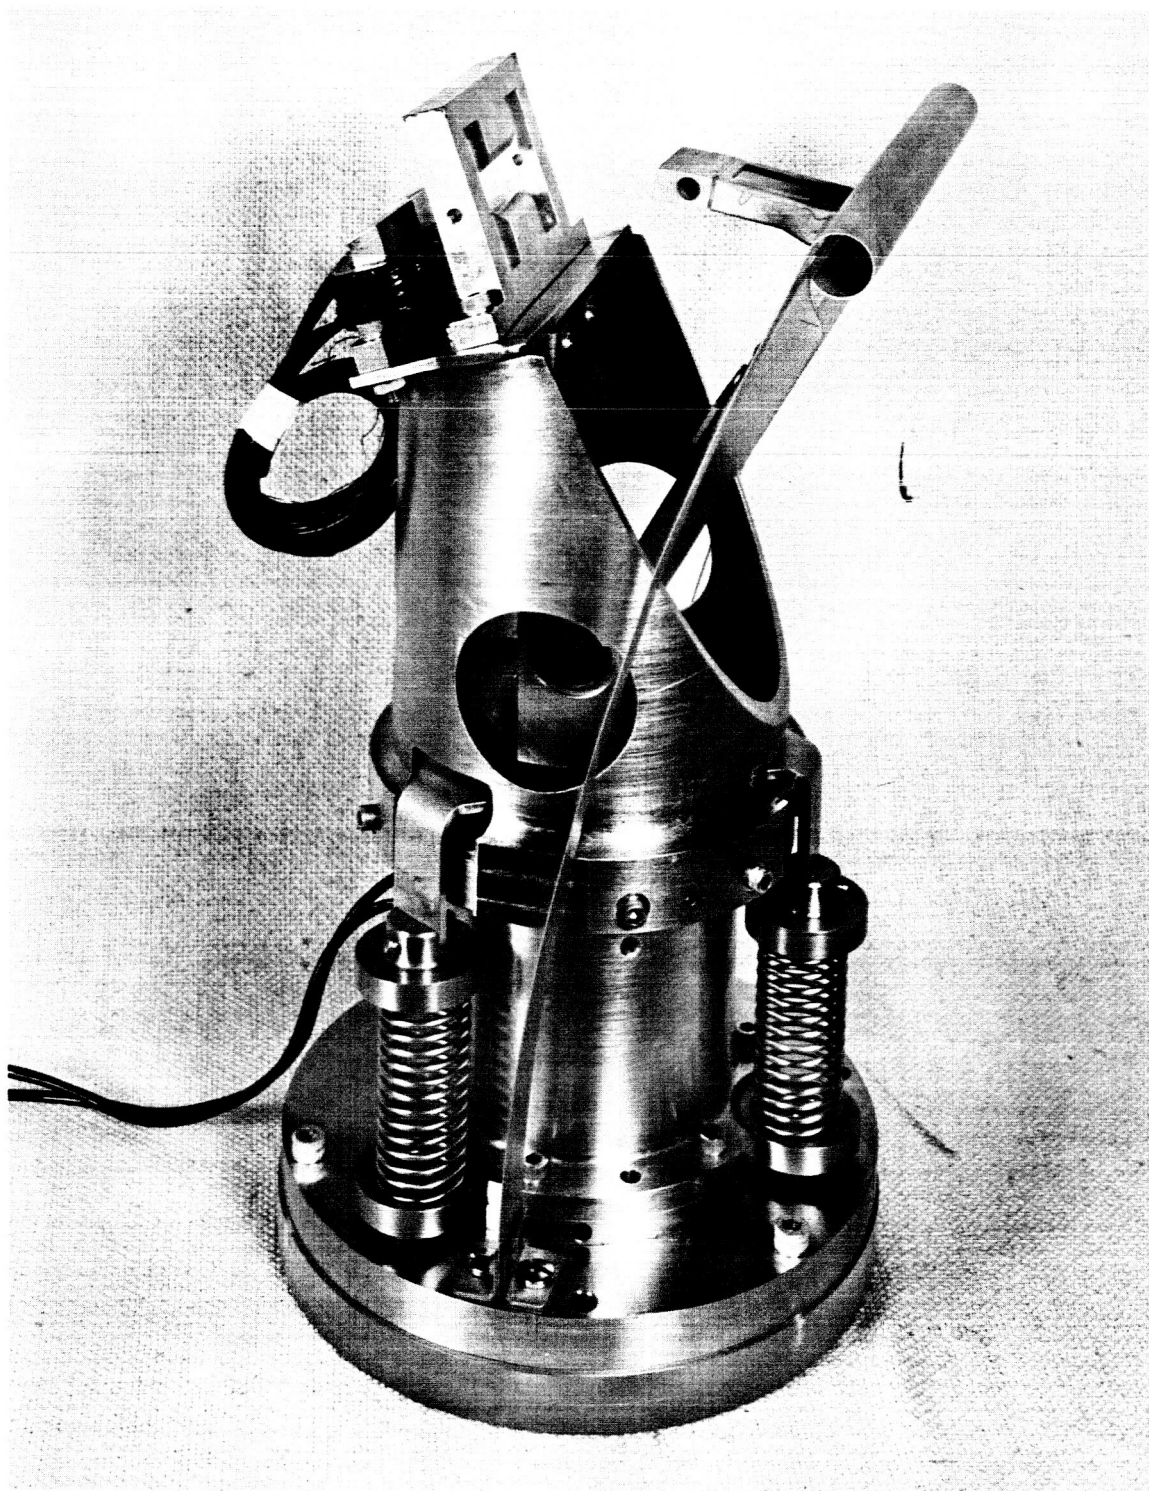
Actuator for Switchgear Units, in Open Position, with Latching Coil but not Tripping Coil in Place at Top of Assembly.
